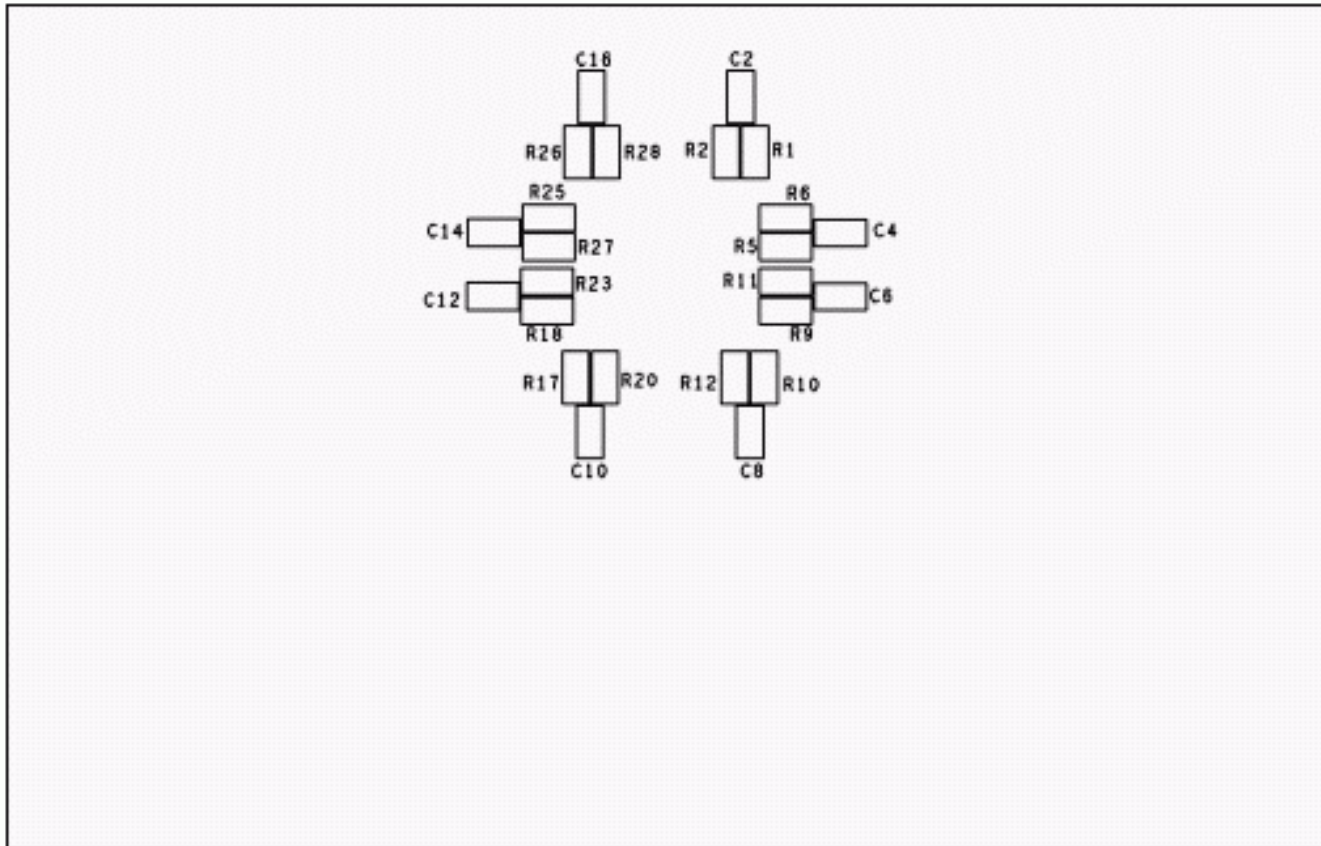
T1x8 100Ω impedance -- Silkscreen bottom layer layout (view mirrored)
